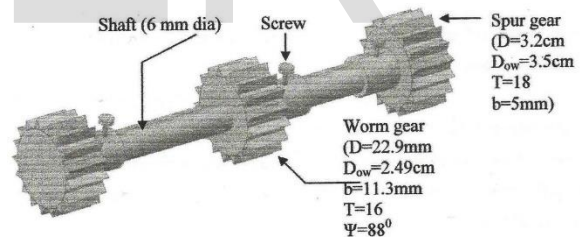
Schematic view of the horizontal shaft with spur and worm gear
